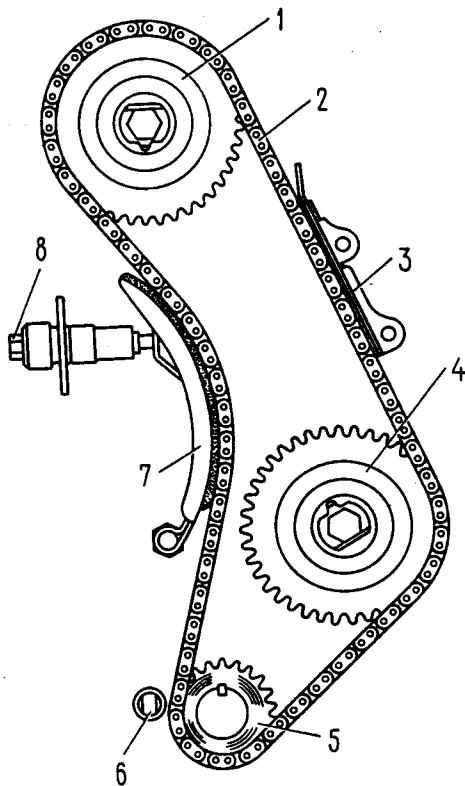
Camshaft and Accessory Drive Diagram:
